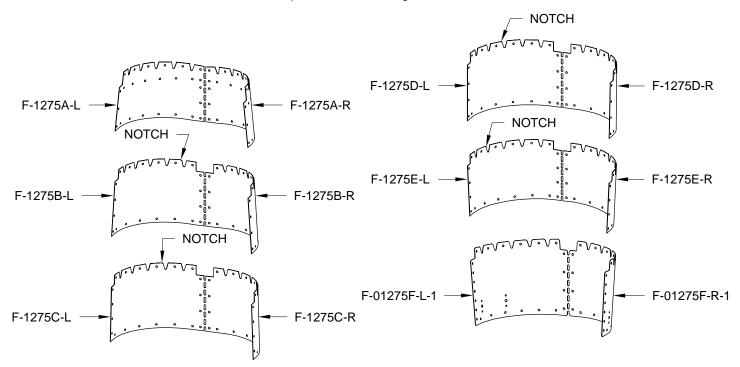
SEPARATING FUSELAGE CORNER SKINS
